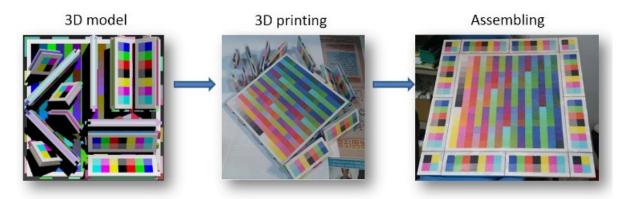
Left: the arrangement of each pieces in Autodesk 3DsMax modeling software. Each piece is arranged to face particular direction. Middle: printed sample after post-curing process. Right: the printed sample after puzzle-like assembling.
